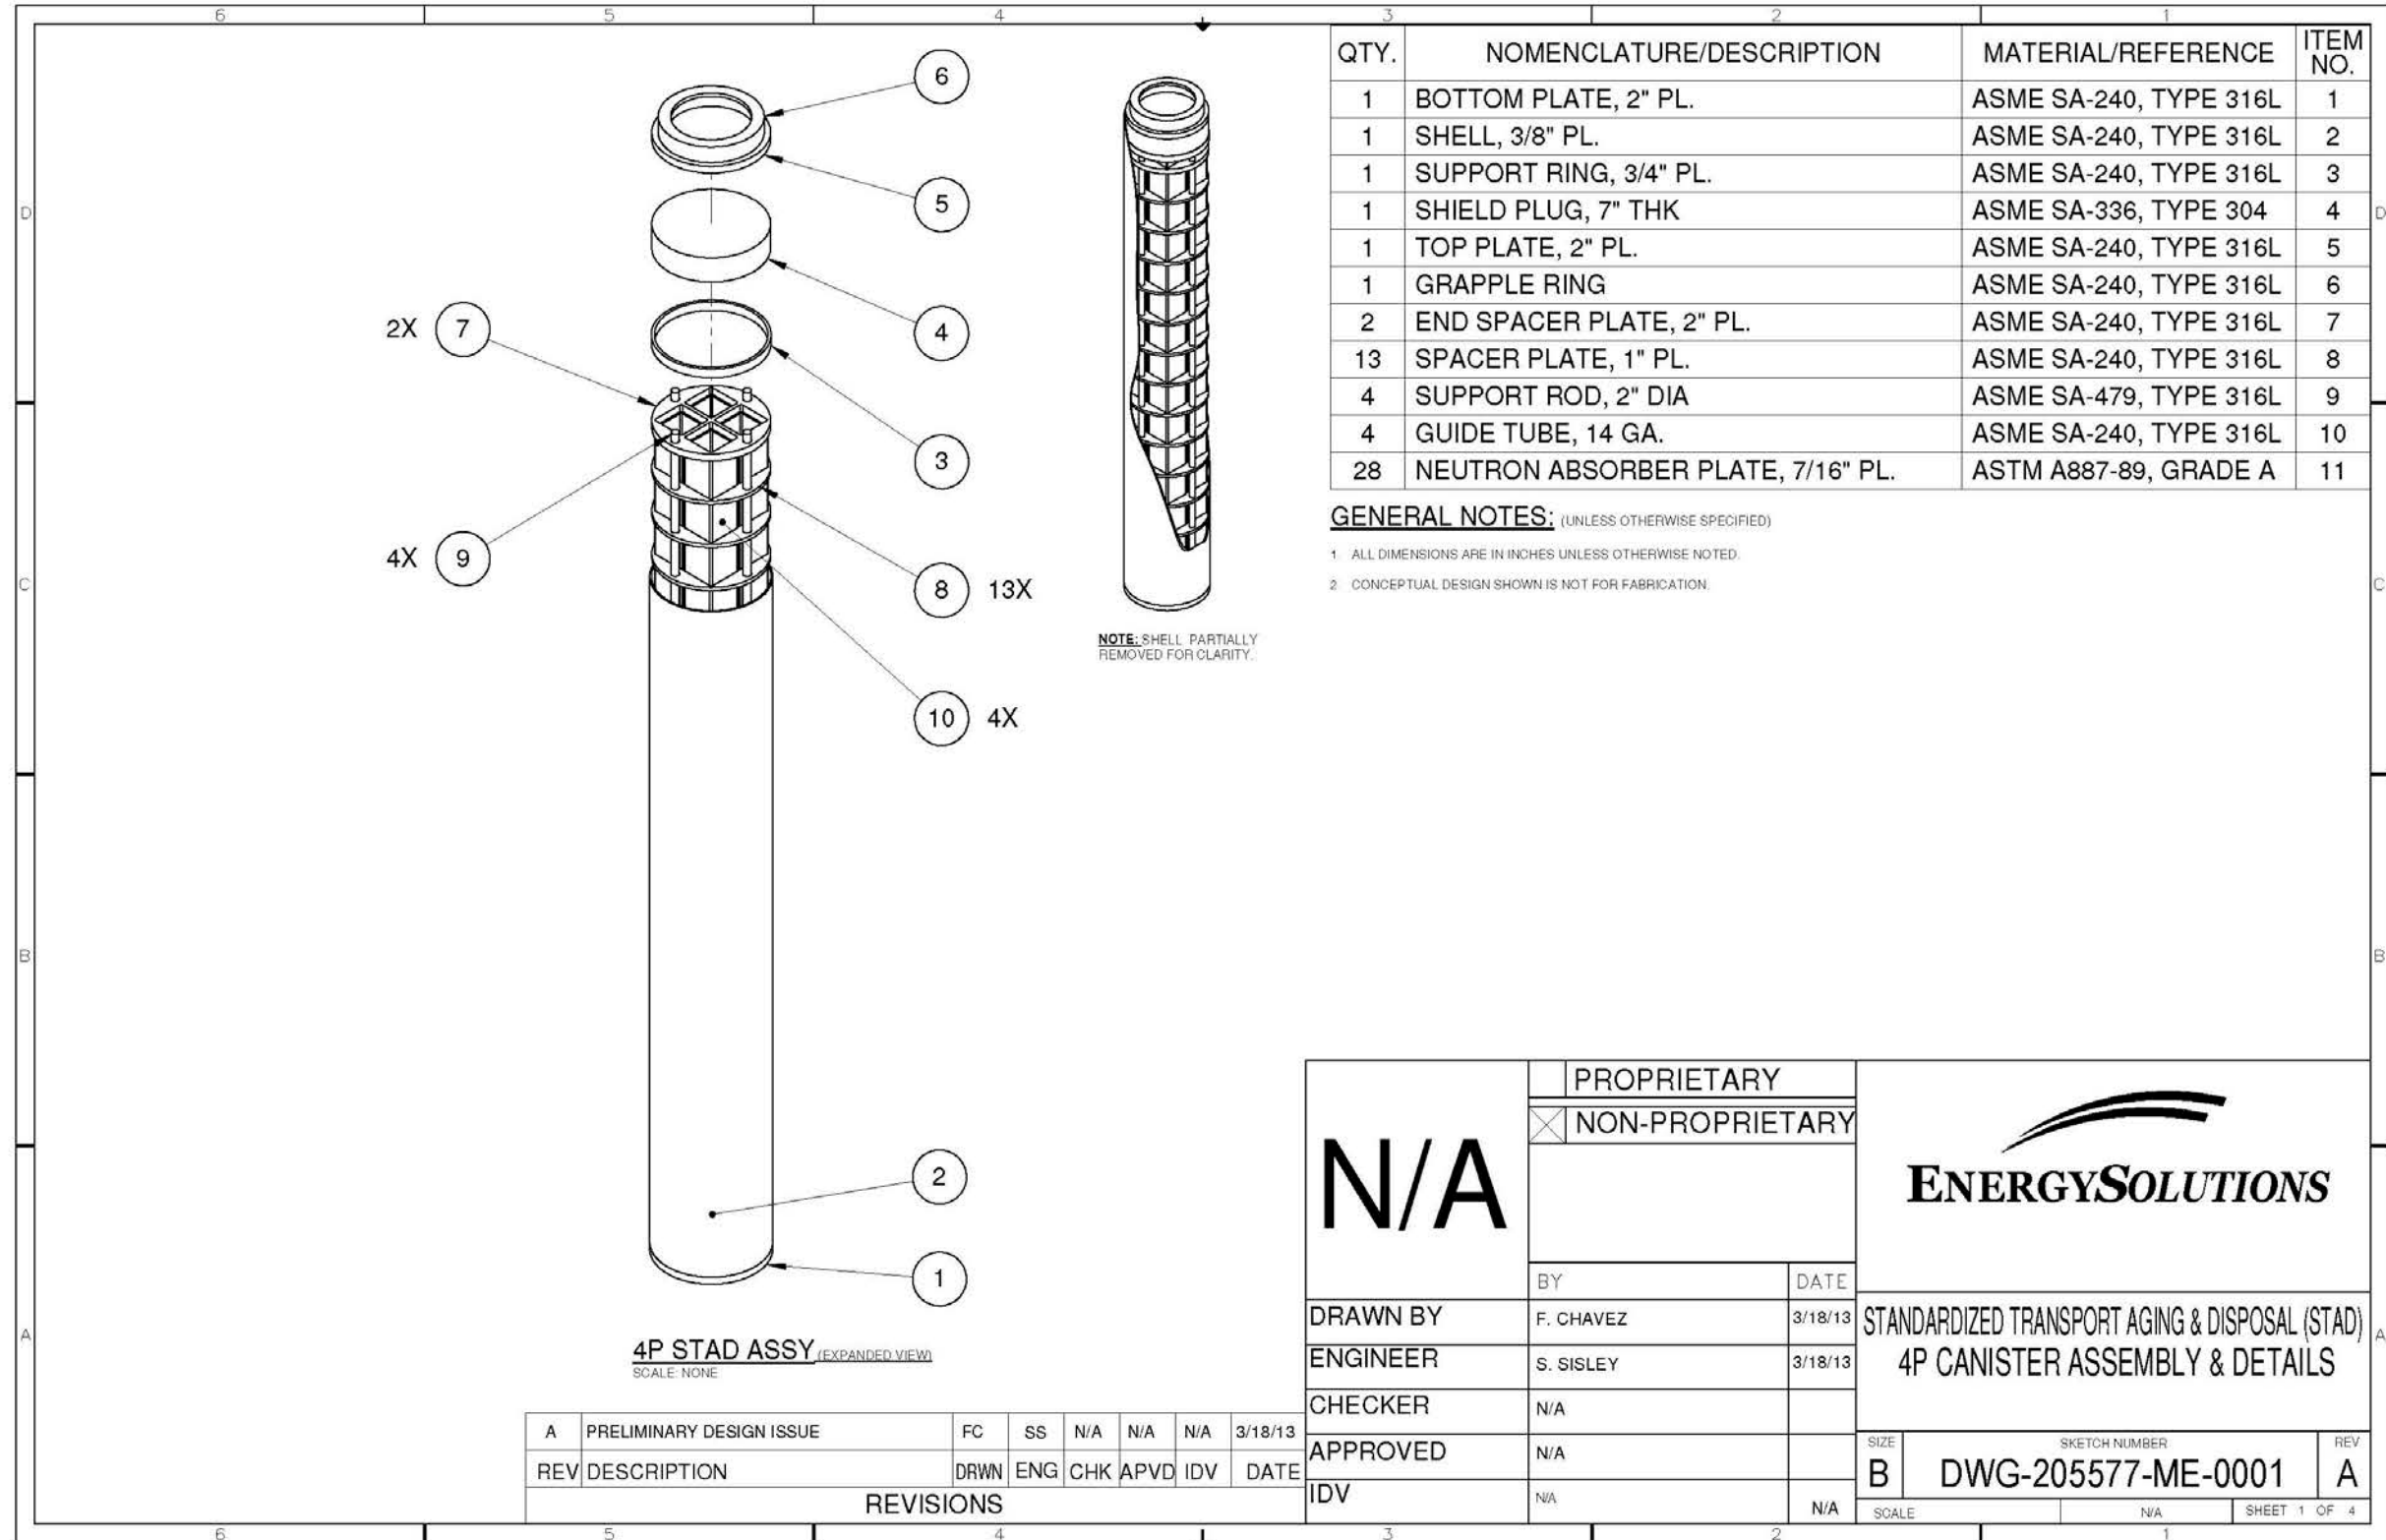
Standardized Transport, Aging and Disposal Canister – 4 PWR Assemblies- Assembly & Details – Sheet 2 of 4
